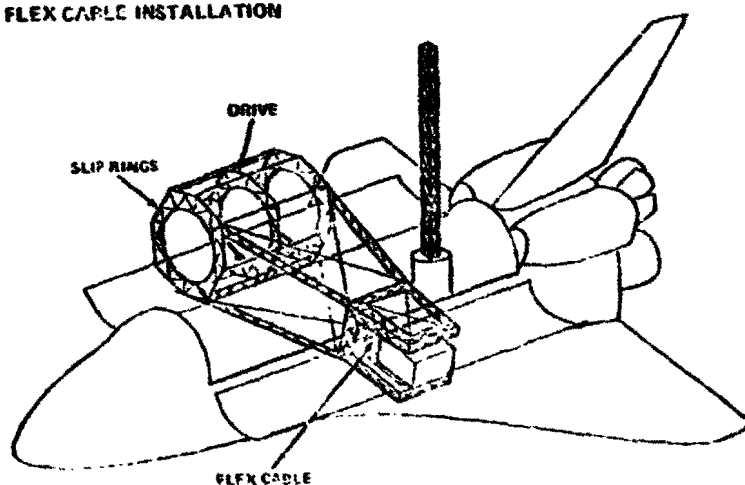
(a). Mission 7 - Rotary Joint Assembly
